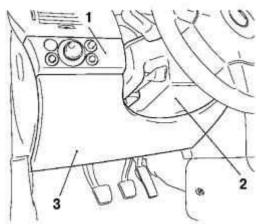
Removing the front panel finish: 1 - light switch, 2 - facing the steering column, 3 - the lower instrument panel pad
